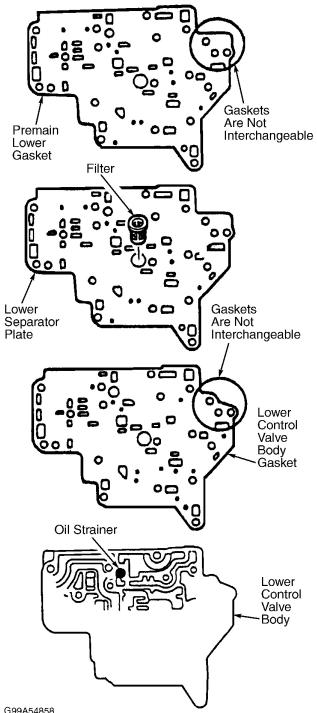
Identifying Premain Valve Body Oil Strainer (Underside) Courtesy of FORD MOTOR CO.
